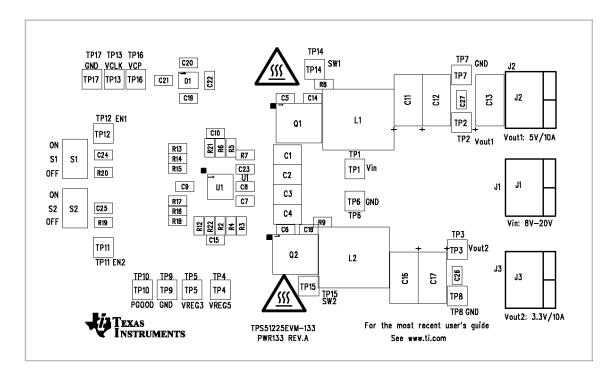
TPS51225EVM-133 Top Layer Assembly Drawing
